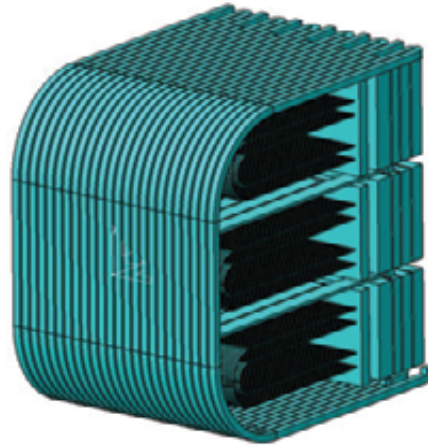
Helium circuit (filled voids) Component in test case CAD file FLUID_X.
